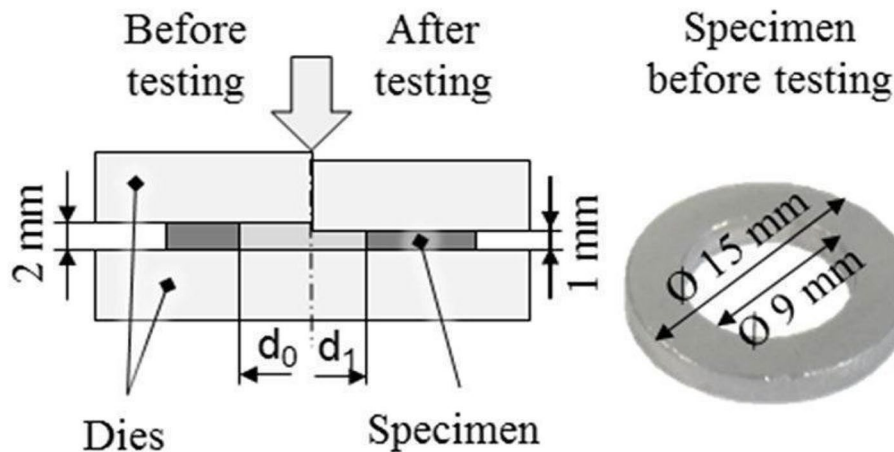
Schematic diagram of the ring compression test setup and specimen geometry (Investigation on blasted tool surfaces as a measure for material flow control in sheet-bulk metal forming. 2024)
